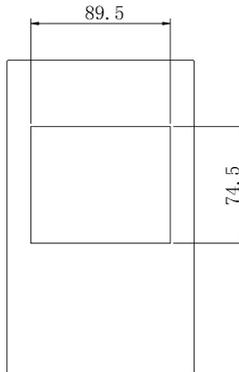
Mounting hole dimensions for operating panel fixed base (unit: mm)
